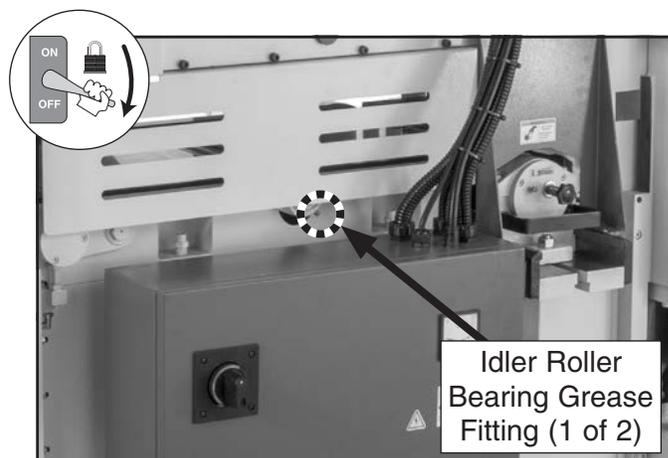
Location of idler roller bearing grease fitting (1 of 2).
